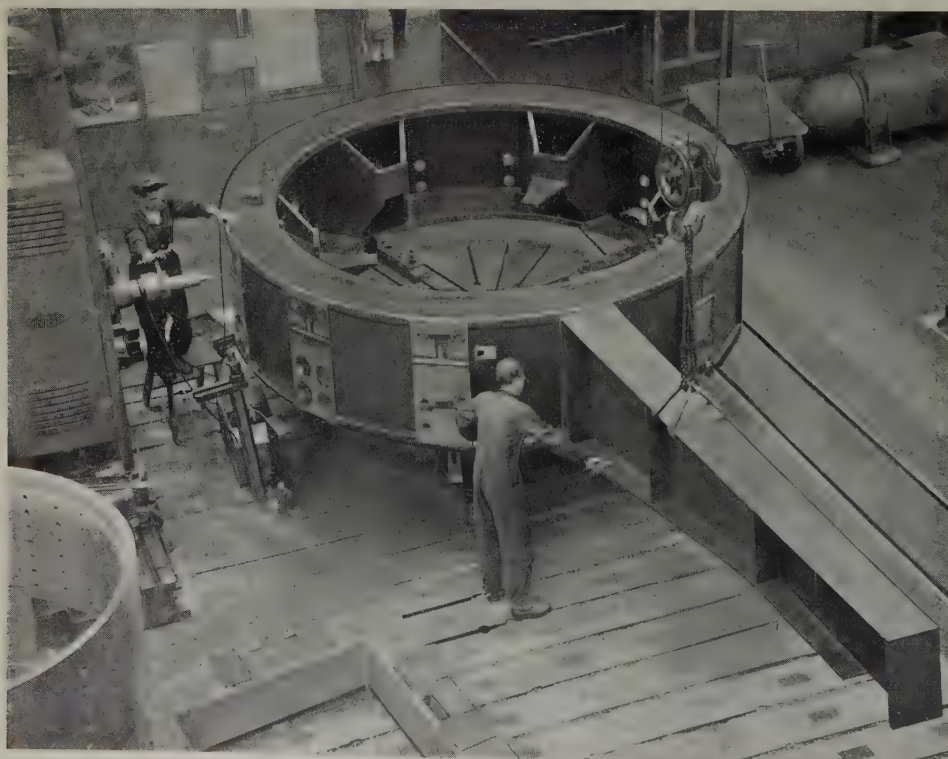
The upper bearing bracket, the centre and one of the twelve arms. The guide bearing is inserted in the middle. (51490)
